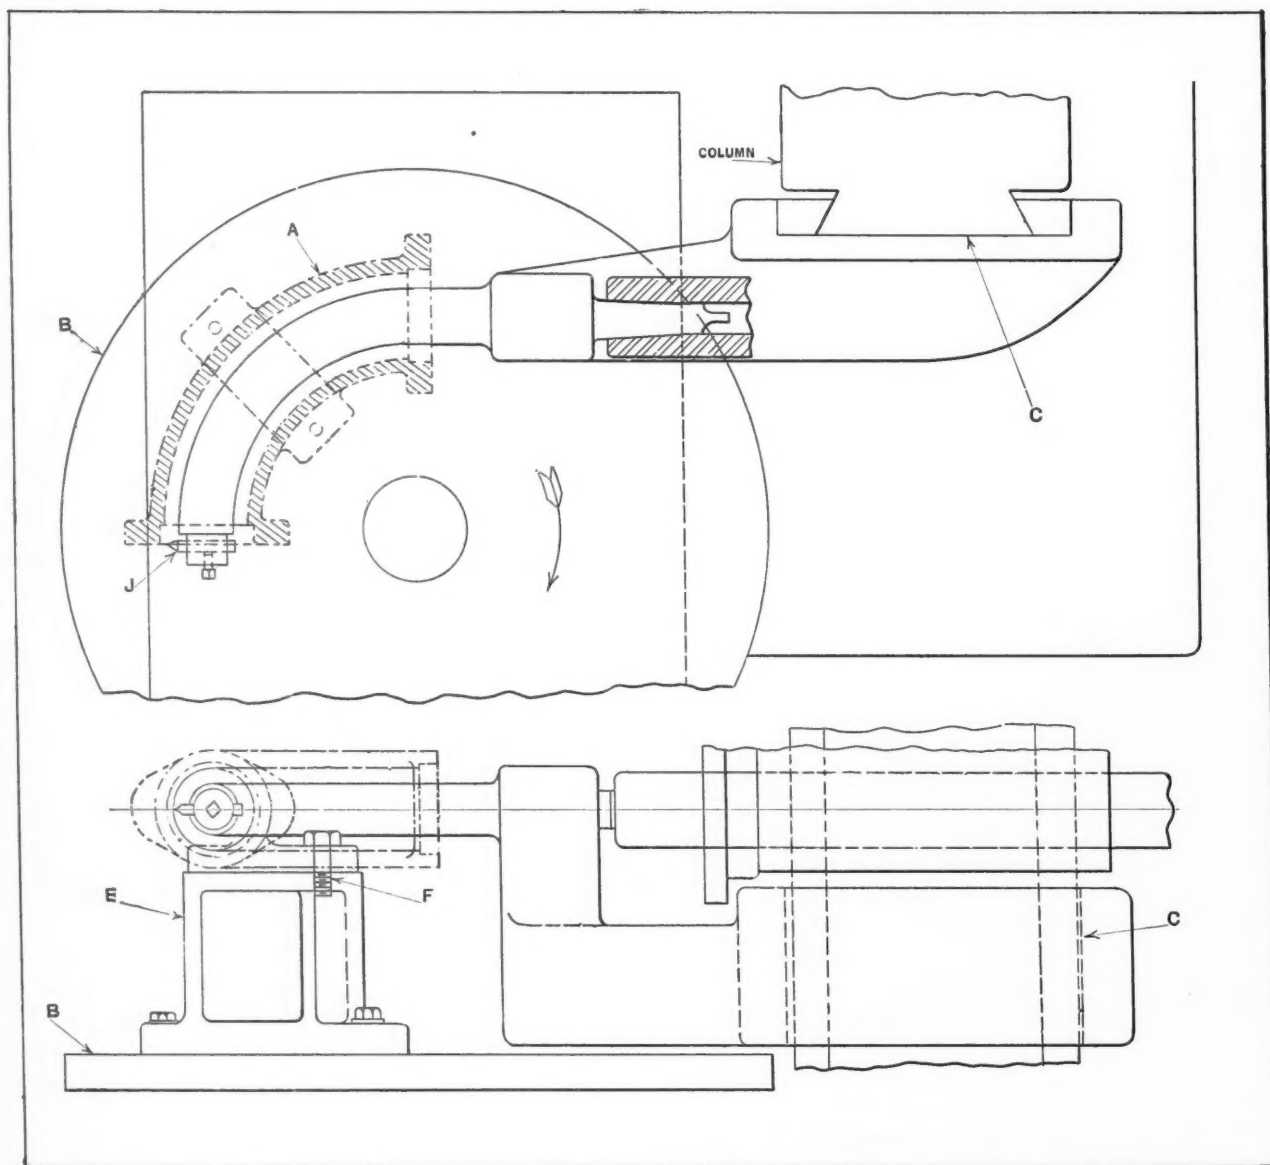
Horizontal Boring Mill Set-up for Boring the Curved Hole in an Elbow
